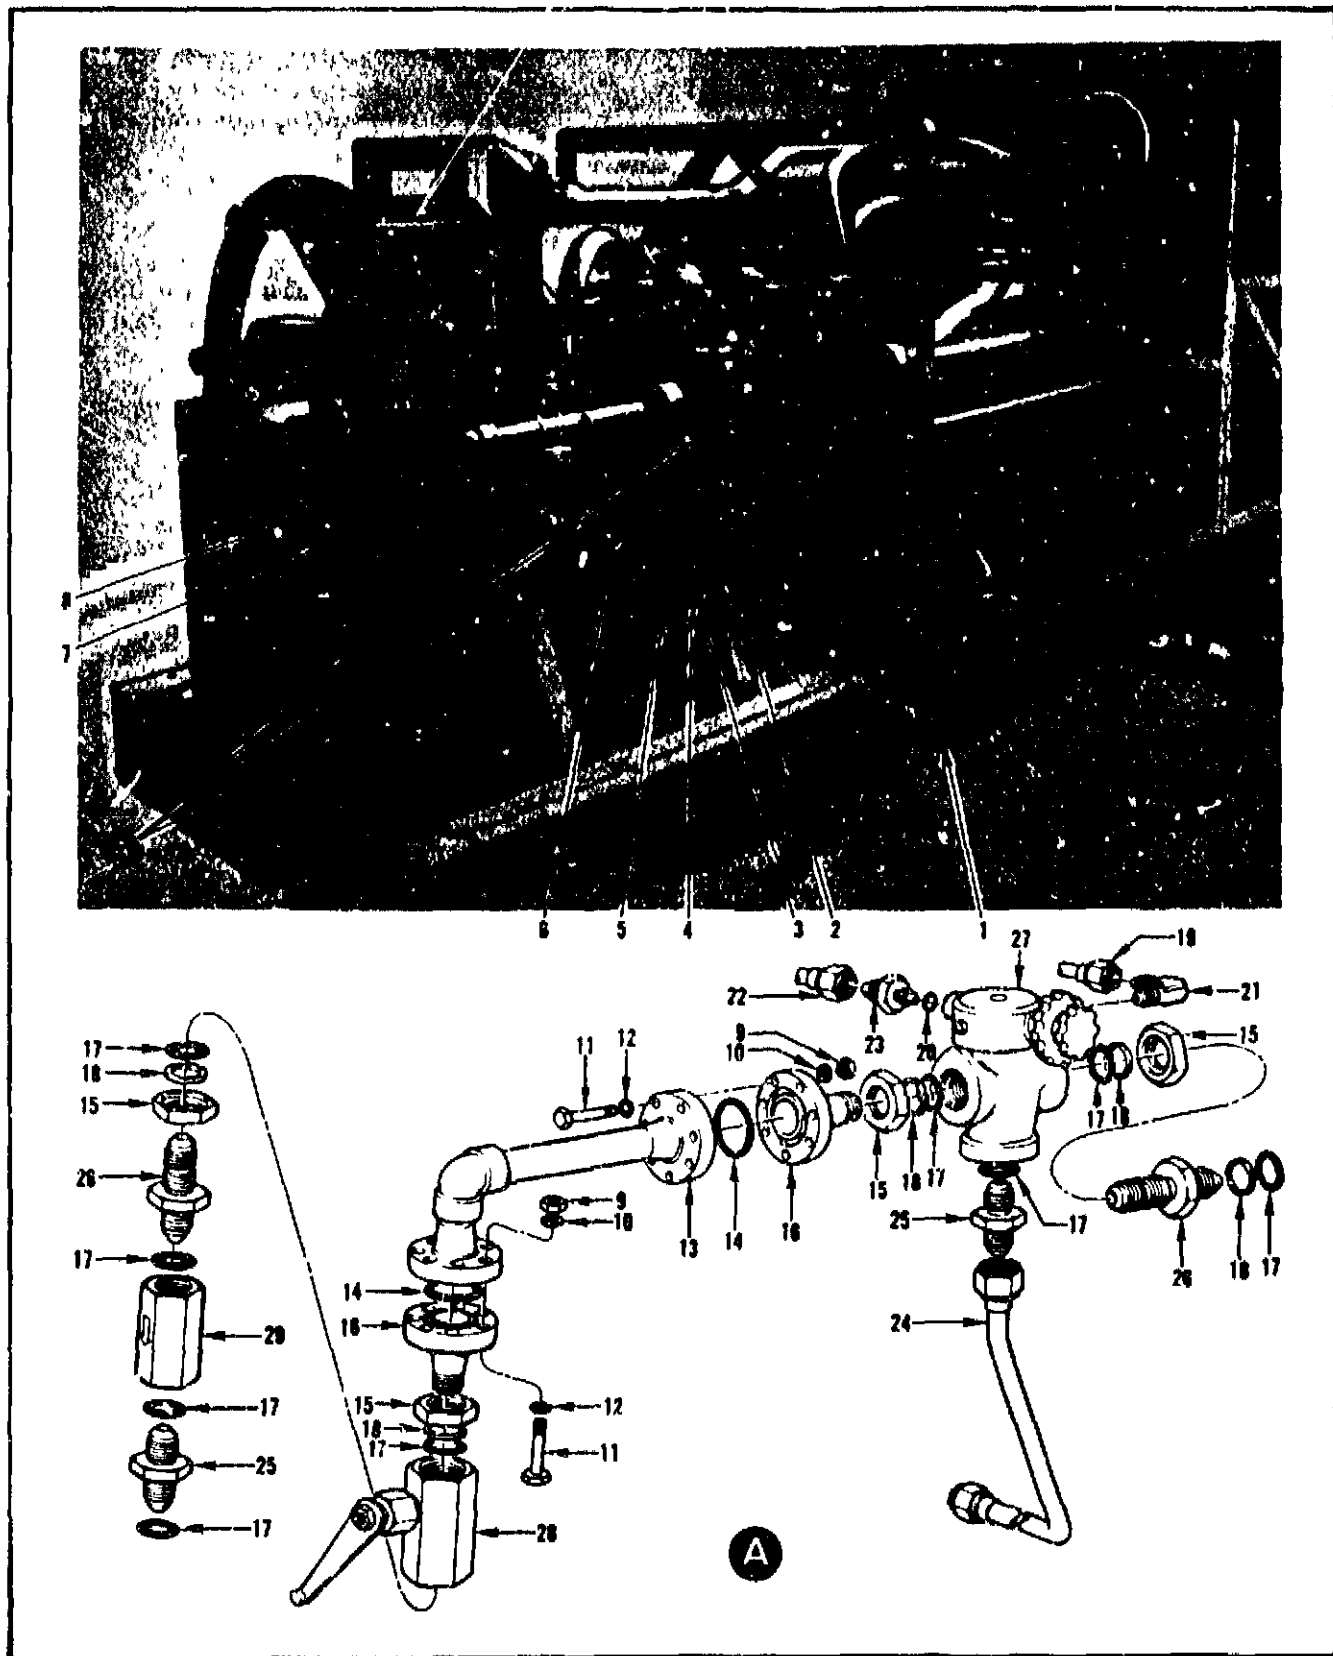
Disassembly of Hydraulic Pumping Unit G202E (Sheet 1 of 2)
